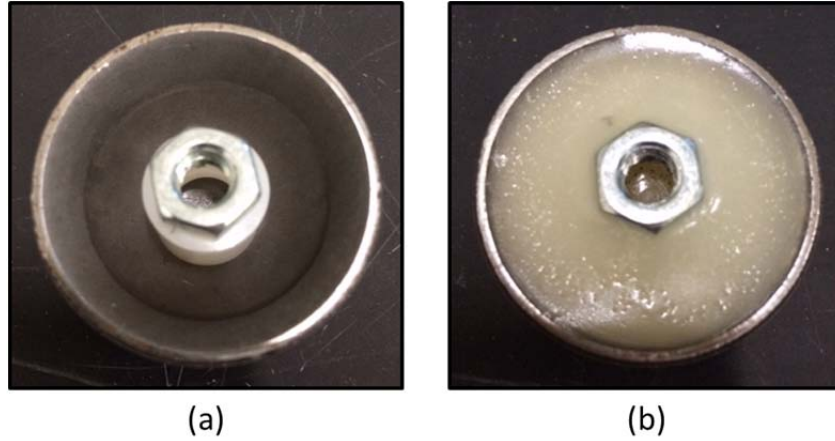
Impactor Connection (a) Set-up Spacer and Nut
